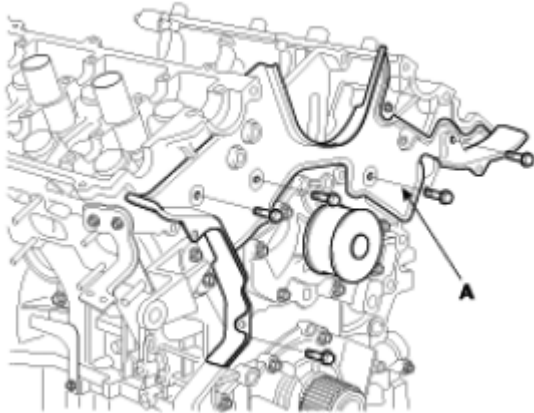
Identifying Timing Belt Rear Cover With Mounting Bolts
